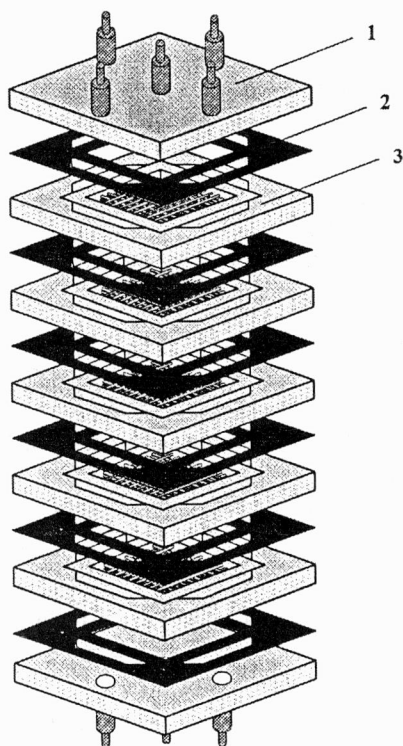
Schematic view of a complete module composed of five submodules: 1 – end plates with tube connections, 2 – gaskets, 3 – submodules
